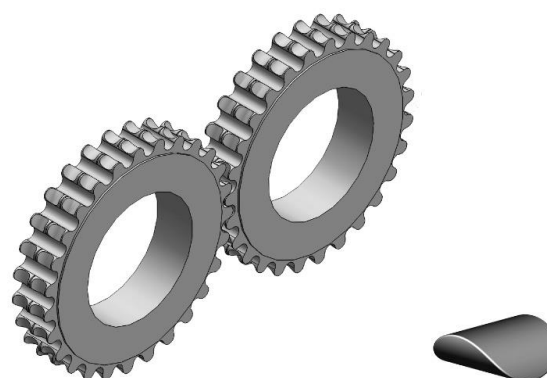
The patented rollers PL 222229 B1 used in roller press compaction unit with a saddle-shaped briquette
